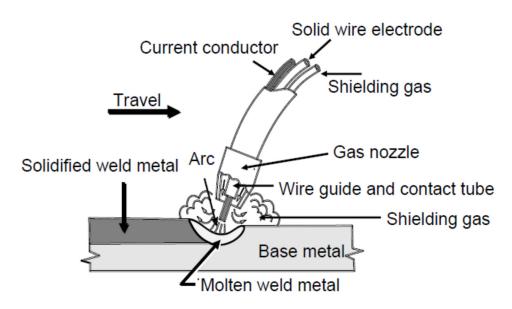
Gas Metal Arc Welding (GMAW).
